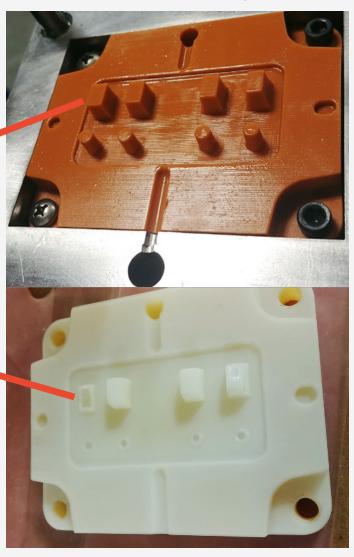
Fiber Reinforced 3D Printed Tool vs. Neat Polymer Tool
